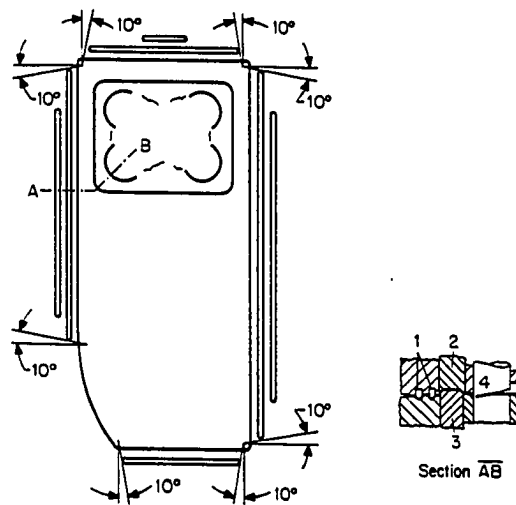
Layout of drawbeads for a car door tooling, [Lange, 1985].
